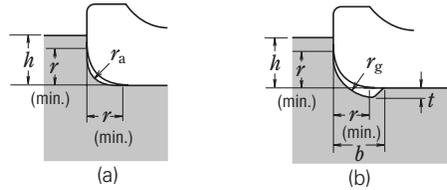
2 Chamfer Dimensions, Fillet Radius, and Shoulder Height
